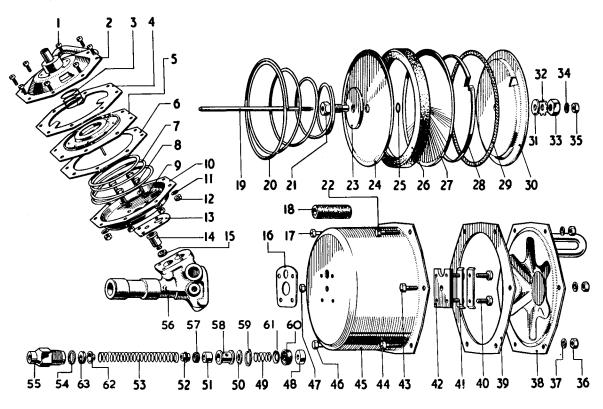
Exploded view of the $6\frac{7}{8}$ " servo unit.
